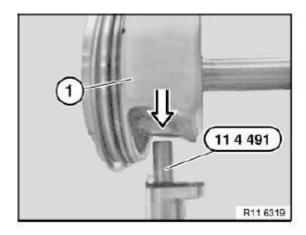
Identifying Piston And Special Tool (11 4 491) Courtesy of BMW OF NORTH AMERICA, INC.
